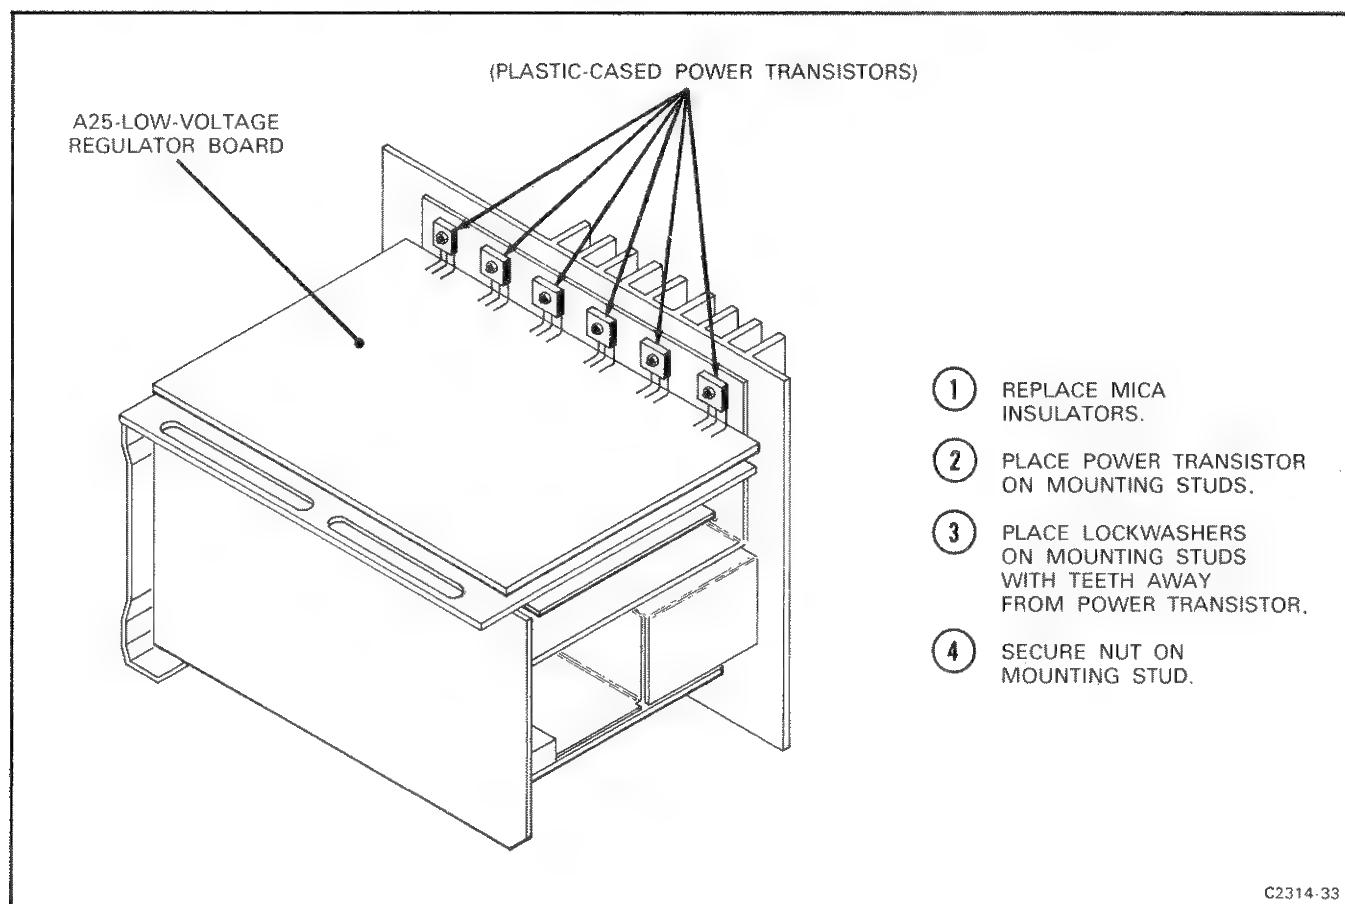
Correct placement of power transistor and mounting hardware on rear heatsink.
